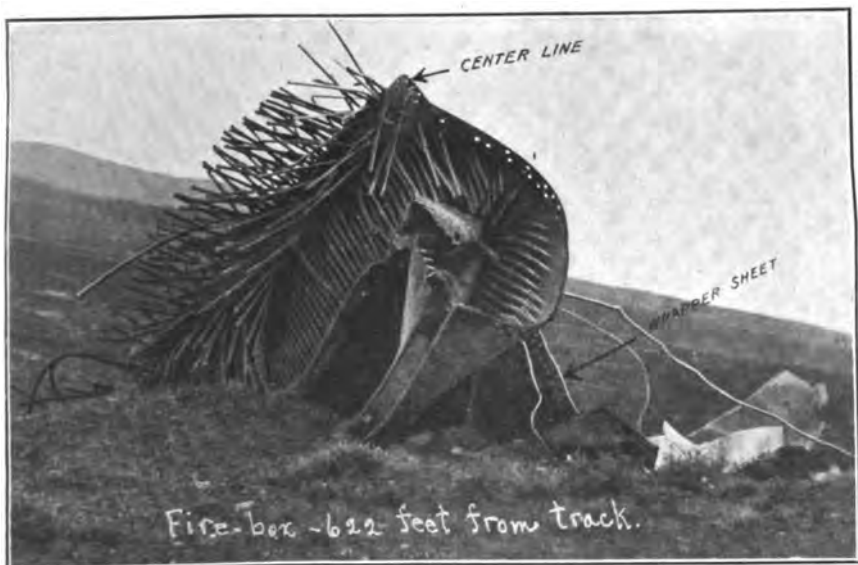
PLATE IX.—Explosion due to excessive pressure and defective barrel.
